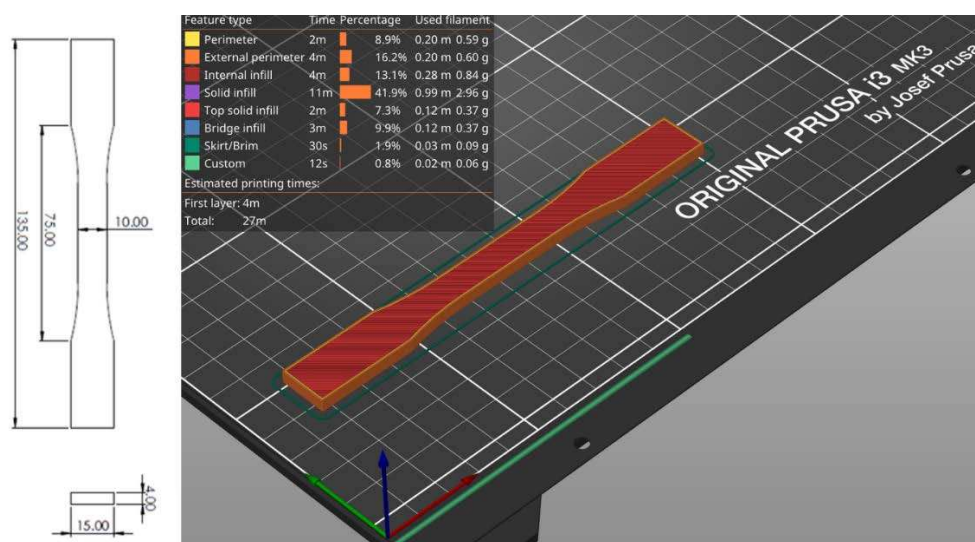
Test specimen (ISO 527-2 standard test specimen for uniaxial quasi-static tensile testing) – g-code generation in a slicer.
